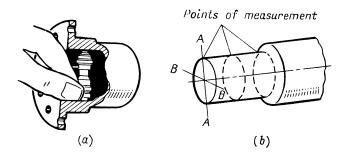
Measurement of fitting dimensions on half-coupling bore (a) and on shaft extension (b)
